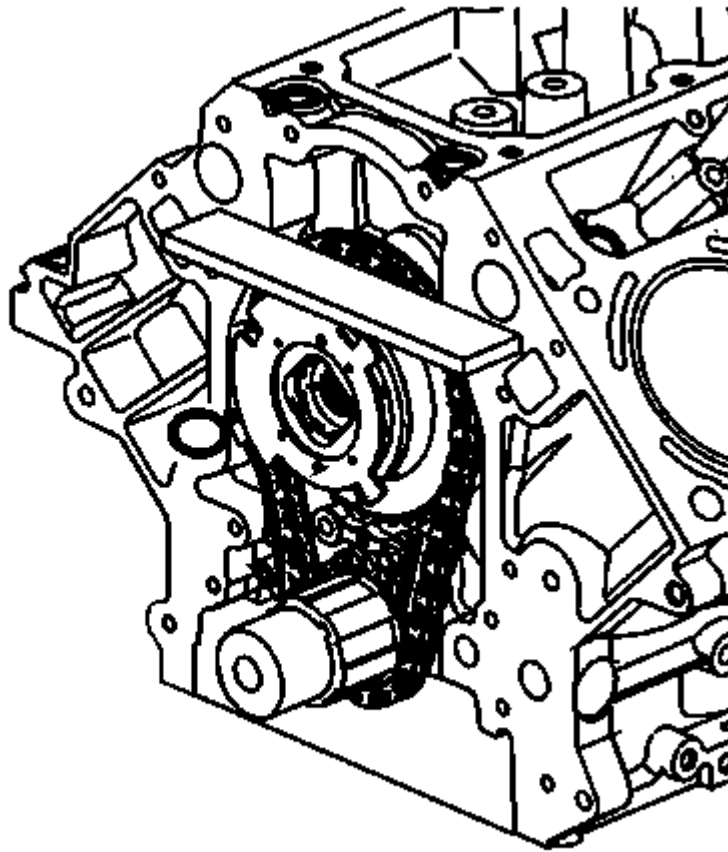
Inspecting Installation Of CMP Actuator And Timing Chain
